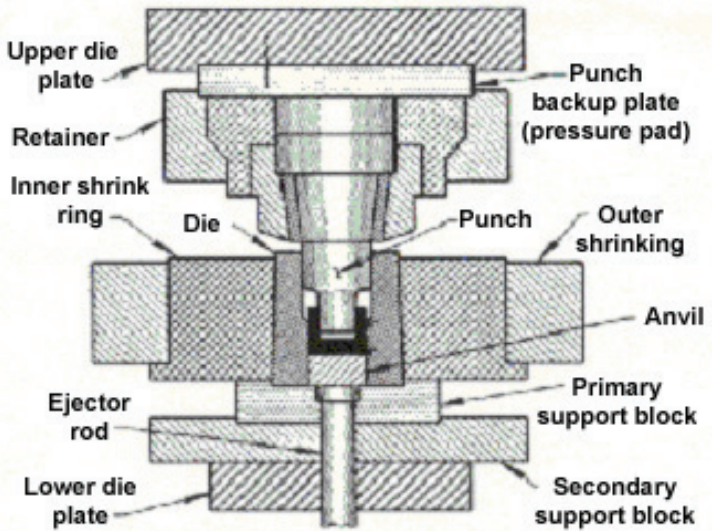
A typical system assembly of cold forming [ASM, 1969]
